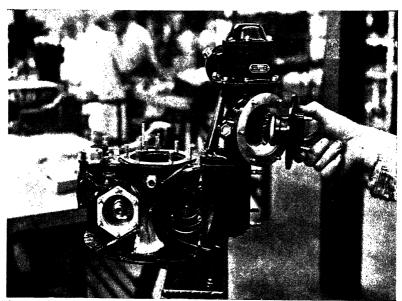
Assembling romec vacuum pump drive and housing to auxiliary drive casing.
